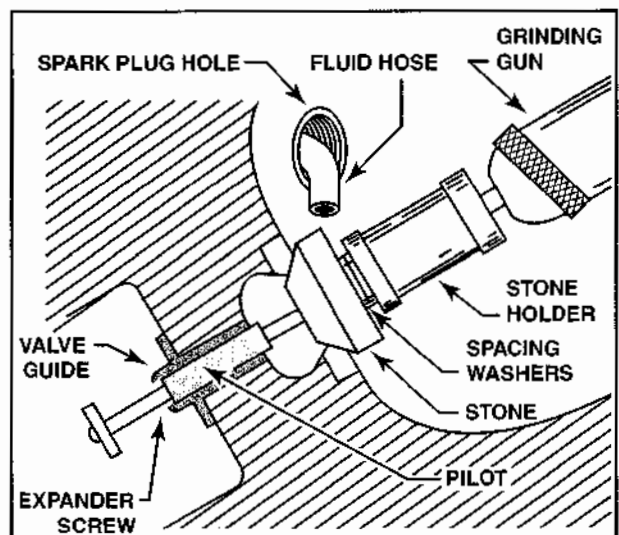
This illustration shows a typical setup for grinding valve seats in an aircraft engine cylinder.
